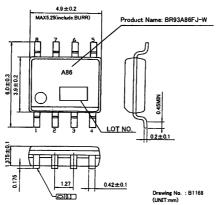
(c) PHYSICAL DIMENSION SOP-J8(BR93A86FJ-W)
